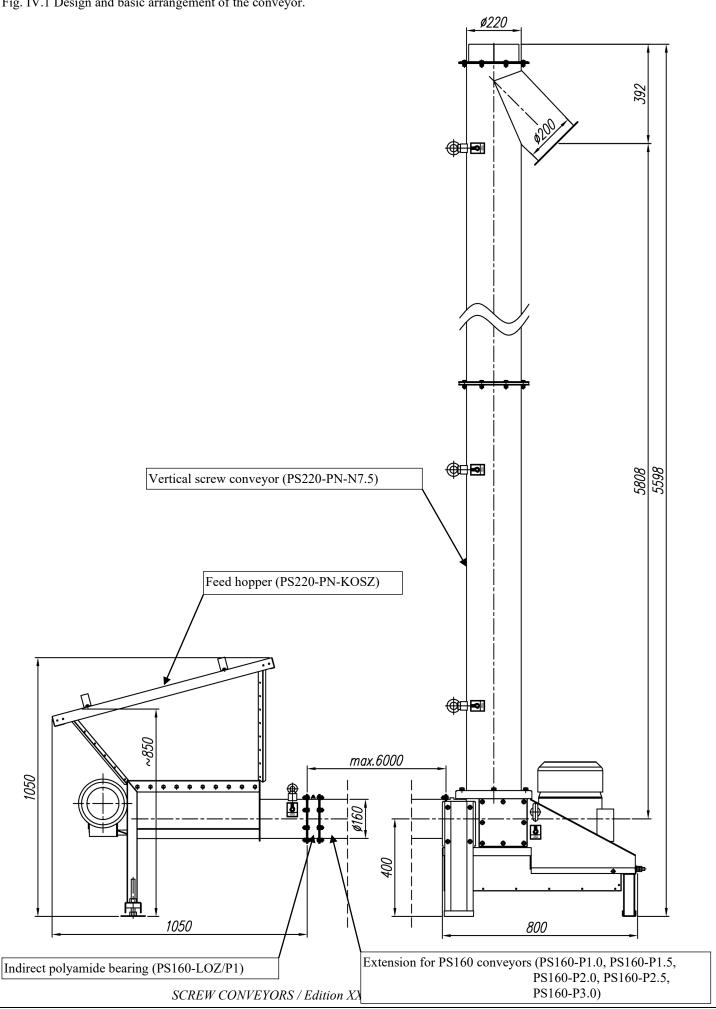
The vertical screw conveyor with a feed hopper - basic dimensions.
